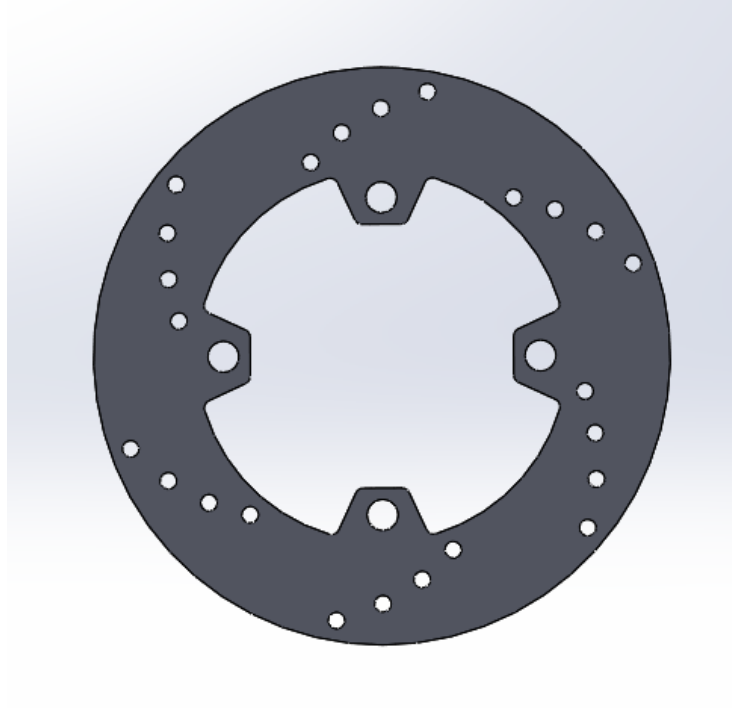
CAD of simple brake rotor with cross-drilled holes
